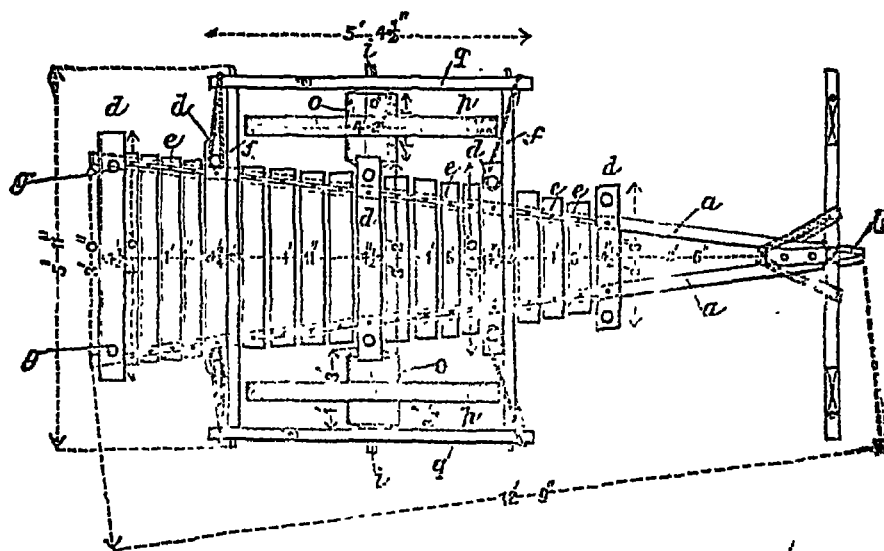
is a plan of a country cart of Northern India: a, a are the shafts; b a wedge-shaped piece of wood; d, d cross-pieces nailed to the shafts; c, c planks forming the bottom of the cart; f, f cross-pieces which help to support the wheel; g, g holes in cross-pieces, into which the uprights h, h (fig. 5, page 17) are fitted; i, i are the ends of the axle; o is the nave; p the rim of the wheels; q, q are the pieces of wood which keep the wheel in position. Scale 3 feet = 1 inch. (Drawn by Rai Saheb U. N. Kanjilal.)
